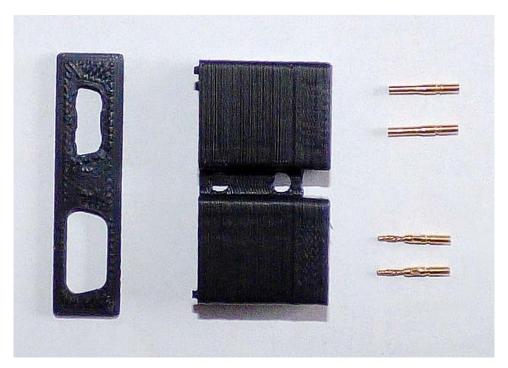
These parts make a device connector. This sample had been printed on a hobby-type 3D printer and shows a relatively coarse surface structure.
